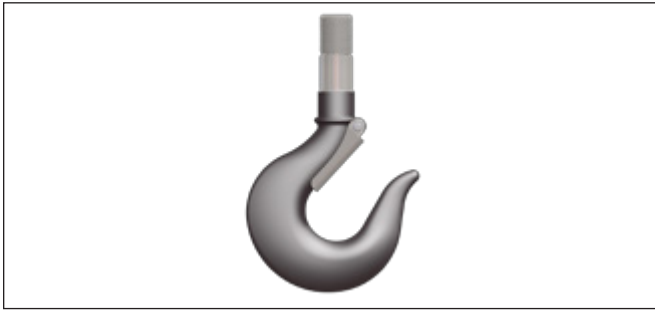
LATCH TYPE HOOK (Upper and Lower)
